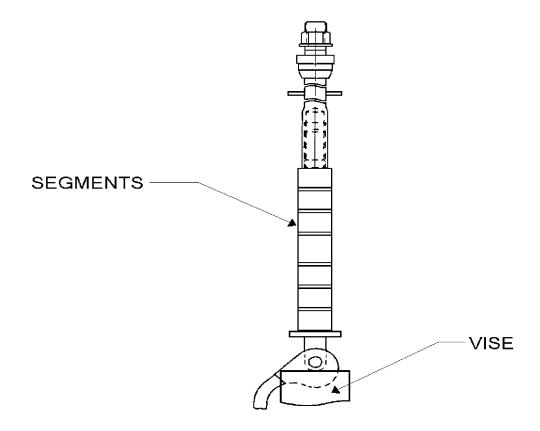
Sheet 2. Use of Expandable Pin Cleaning Tool
